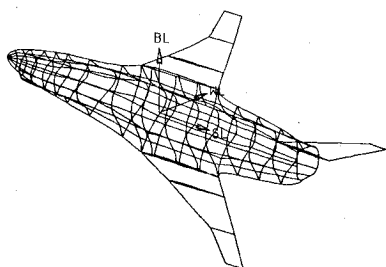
SURFACE DESIGN model being rotated at the terminal.
